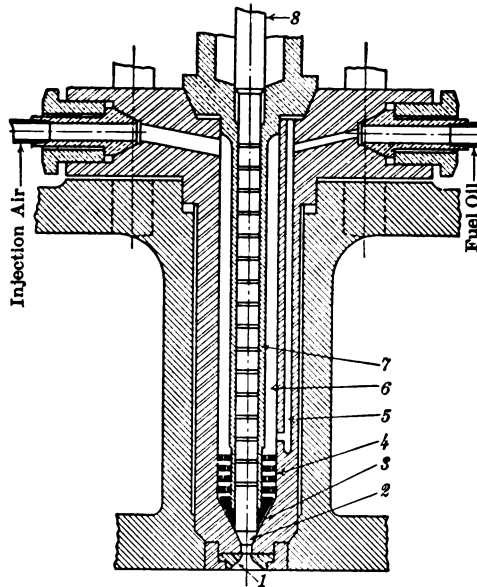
COMMON TYPE OF FUEL VALVE OR ATOMIZER
